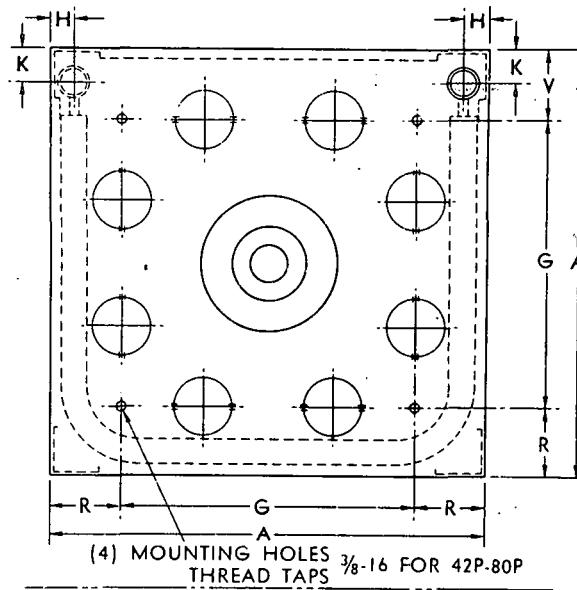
Dimensions, Model P Unit Heater, Sizes 42-80
